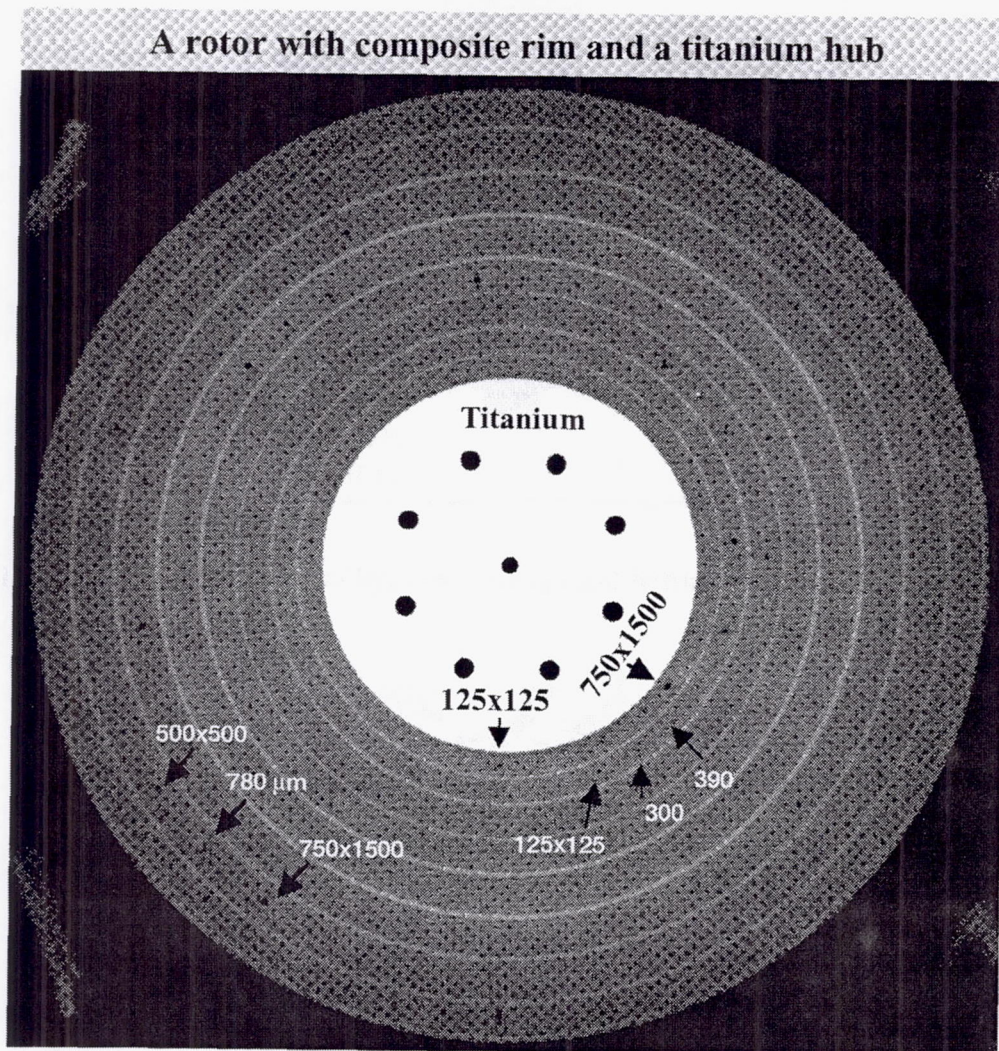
Computed tomography slice of a multi-layered rotor standard with EDM notches and drilled holes set (125 x 125, 300, 390, 500 x 500, 780, and 750 x 1500 μm) in each layer. This set was duplicated in a spiral fashion starting at the innermost ring near the ID and finishing at the outermost ring near the OD.
